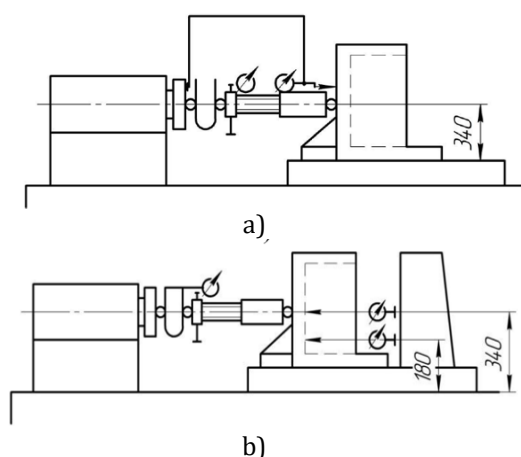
Measurement of static rigidity: a) of the spindle flange and the fixture, and b) of the fixture relative to the table.
